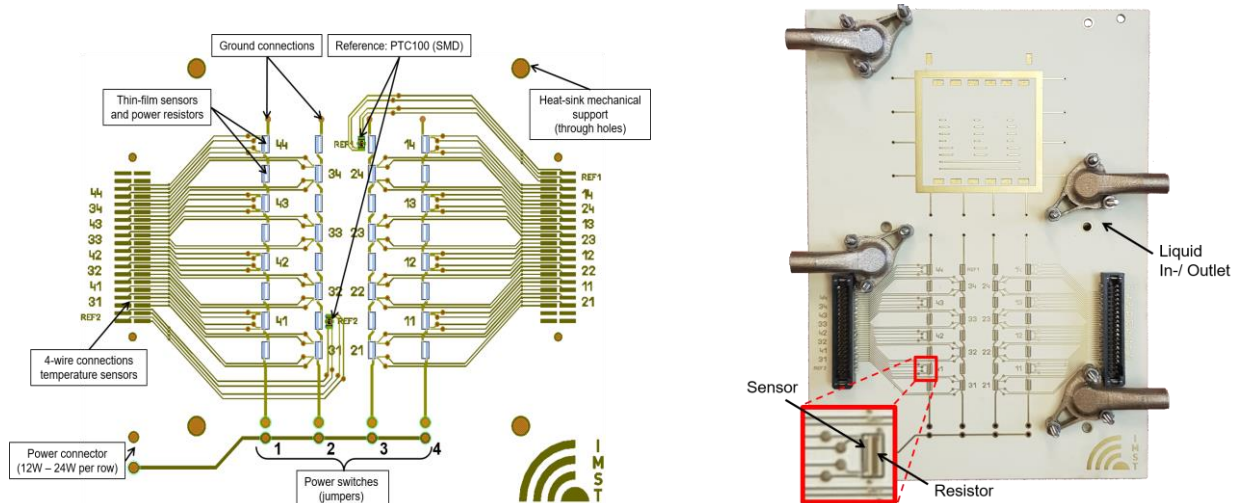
Left: Layout schematic of the thermal test boards; Right: Thermal test board with integrated liquid cooling
